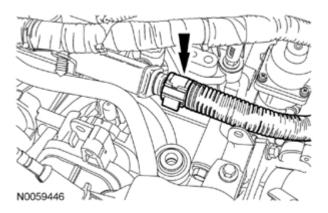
Locating Fuel Supply Tube Quick Connect Coupling Courtesy of FORD MOTOR CO.
